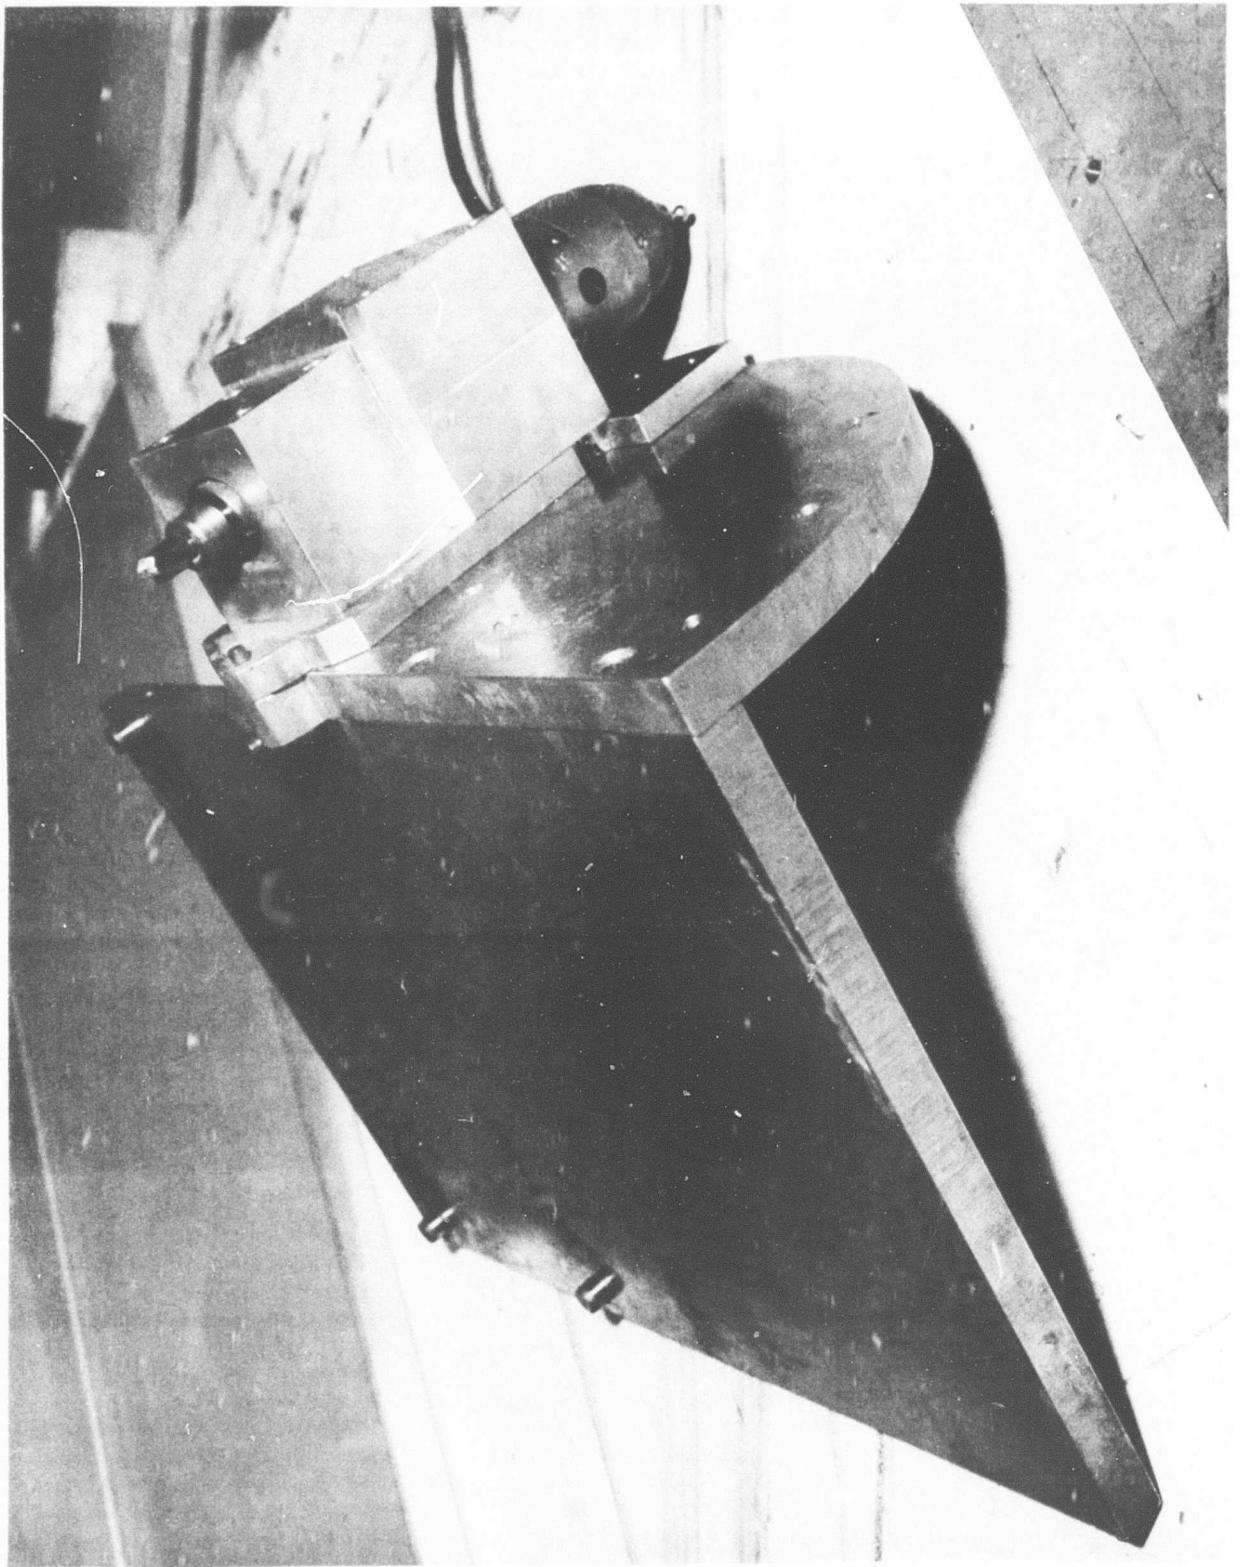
Mill Fixture (MLFX) for Milling Bed Rail Grooves
